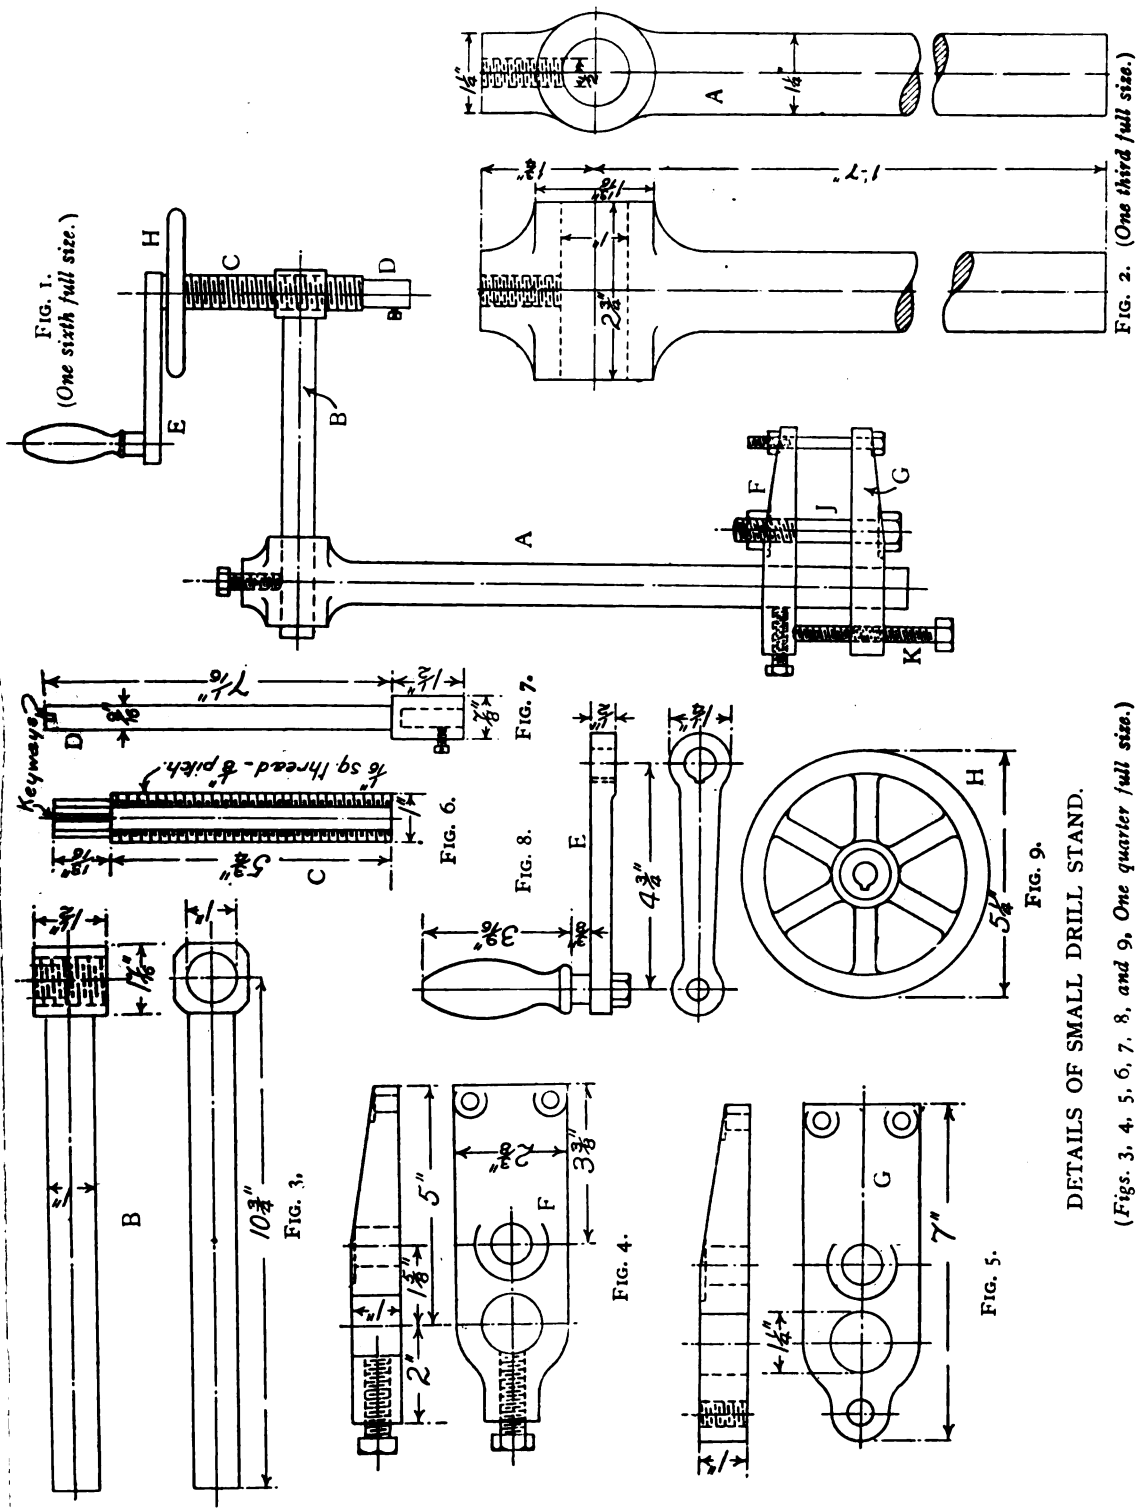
shows the drill spindle handle E, and it might with advantage be made with a ratchet handle.
